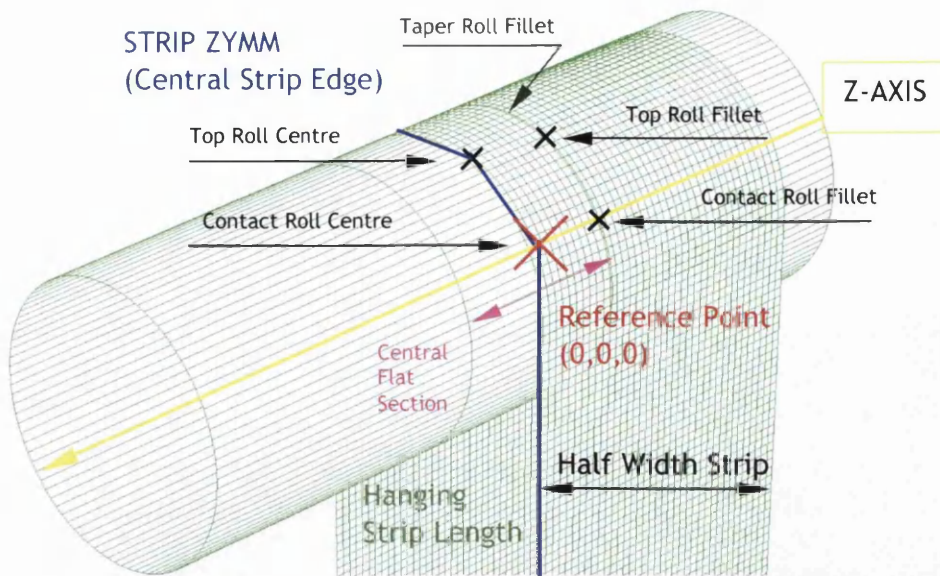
3D Illustration of Typical Roll-Strip Contact Assembly for a Half Strip Width
